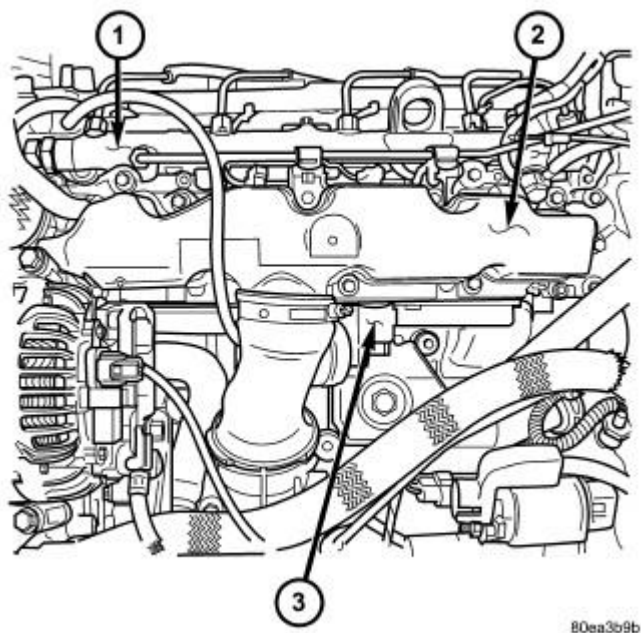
INTAKE MANIFOLD SWIRL VALVE LOCATION
